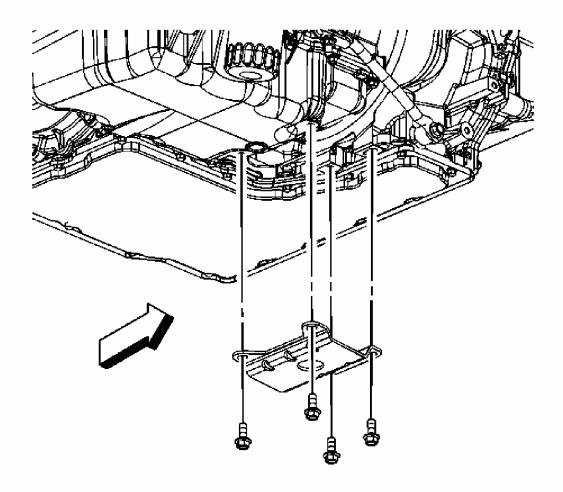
Identifying Transaxle To Engine Brace Bolts Courtesy of GENERAL MOTORS CORP.
